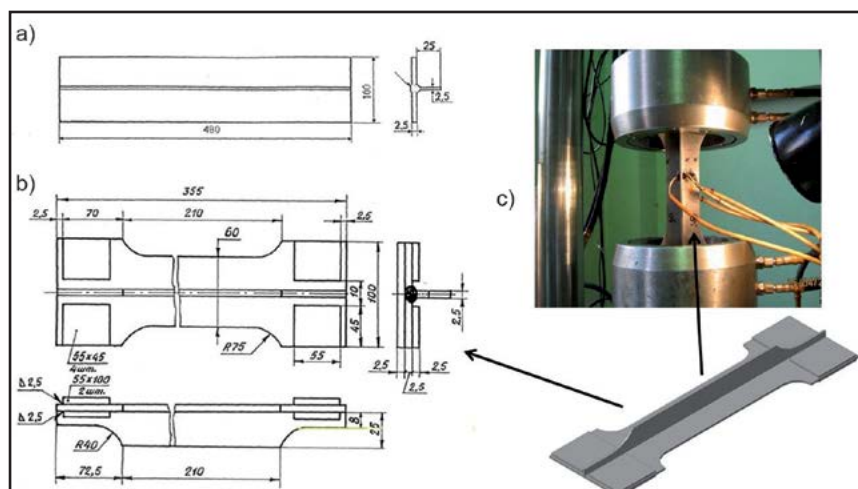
Welded T-shaped specimen of the VT-20 alloy used at the first stage of tests: a – drawing of the welded specimen; b – drawing of the spade-shaped specimen for fatigue tests; c – specimen in the clamps of the fatigue testing machine
